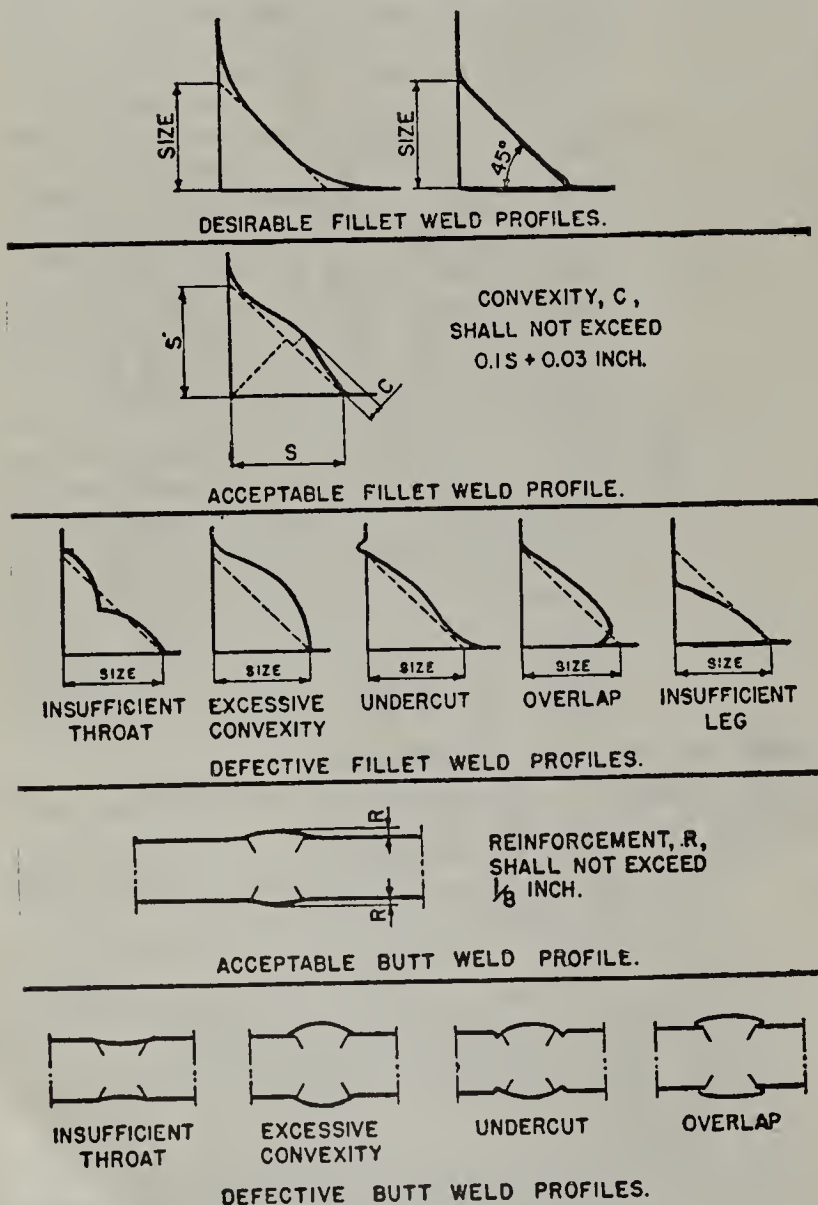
Acceptable and Defective Weld Profiles
